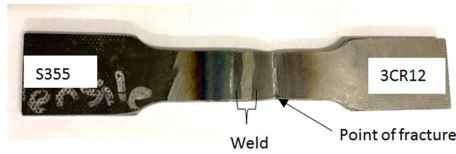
Tensile sample showing weld and point of fracture.
